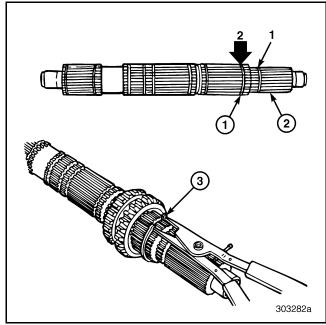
Installing Second Speed Gear Mainshaft Snap Ring (T313L/T318L Shown)
